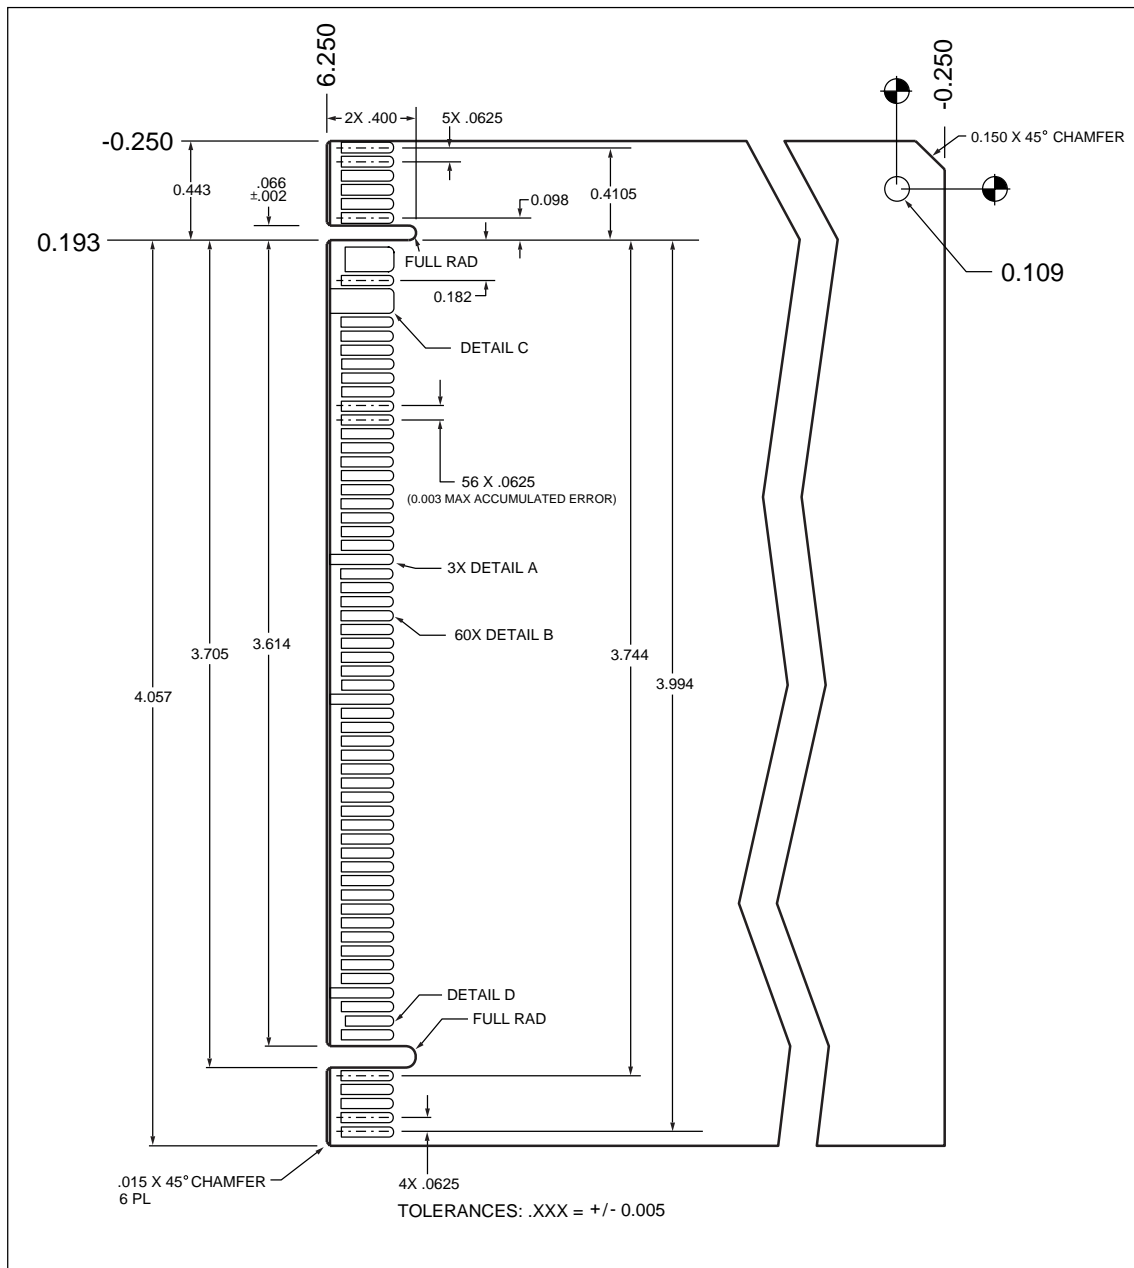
Live Insertion STD 32 P/E Board Fab Drawing (Component Side).
